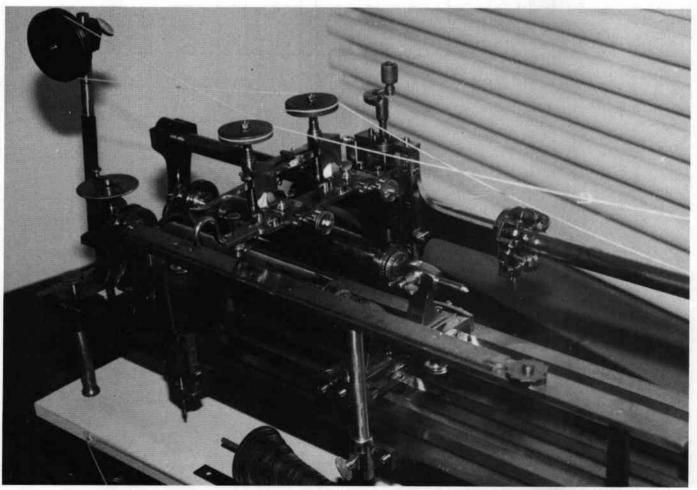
Another view of the cylinder drilling machine, showing the notched bar engaging a step of the 12-tune flat cam on the top rail. The screw handle at the back of the drilling head is for adjusting head height to suit cylinder diameter.
